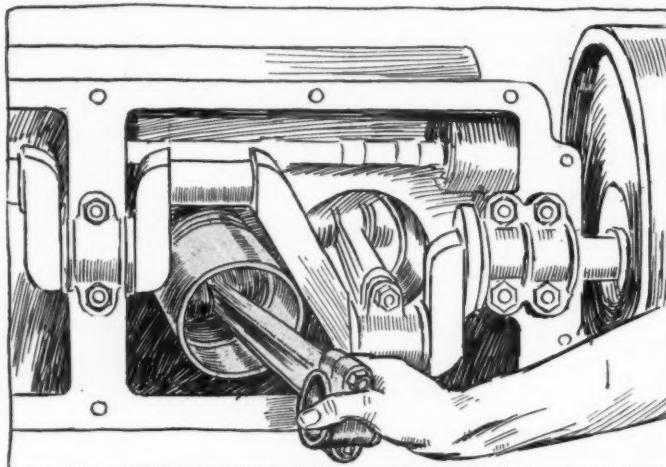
Method of withdrawing piston and connecting-rod assembly after the bottom half of the crankcase has been removed
